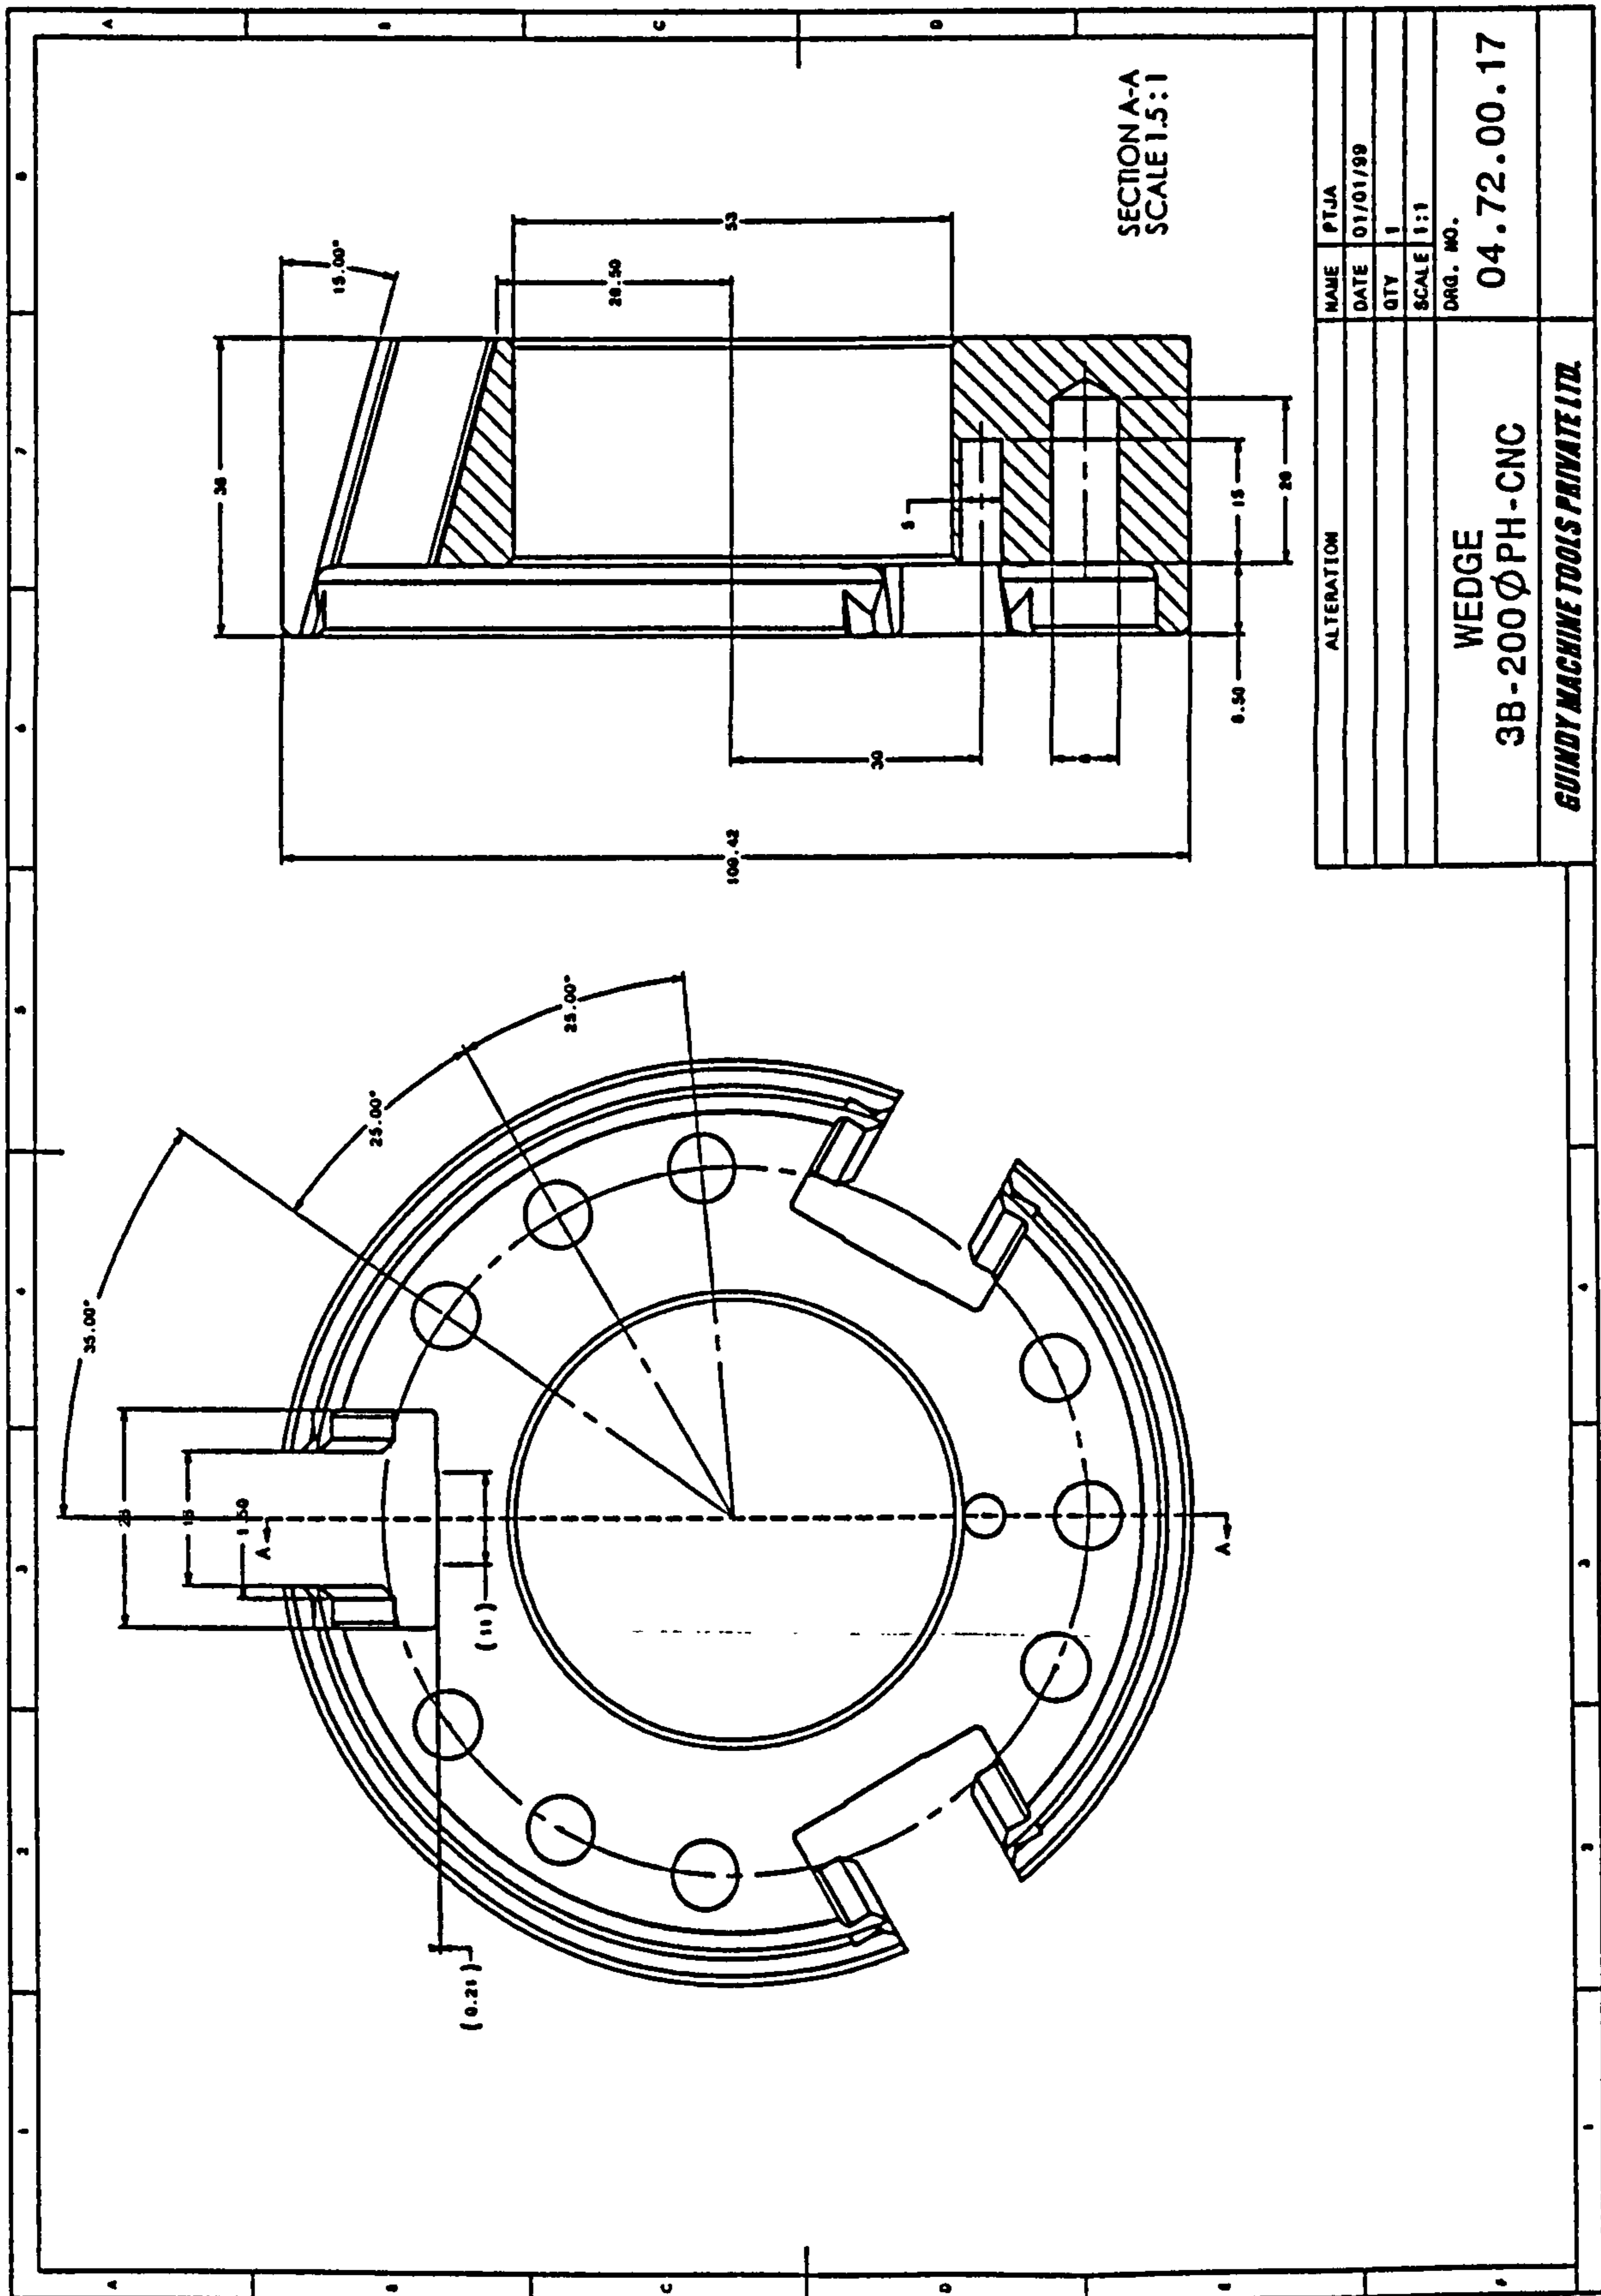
GMT Wedge – Pro/ENGINEER Drawing
